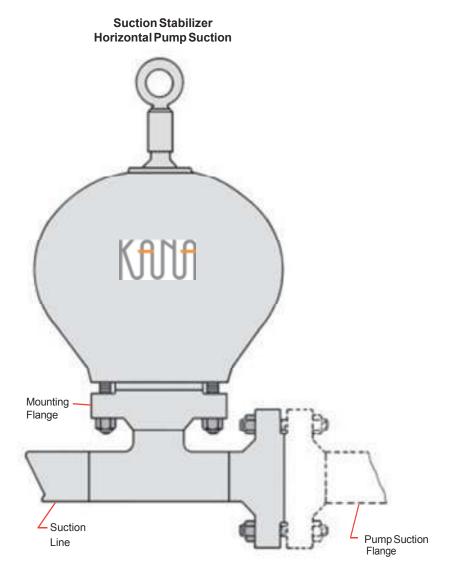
Recommended Installation Piping, for Suction Stabilizer - IP Series, Model SS-20-275 (Typical)
